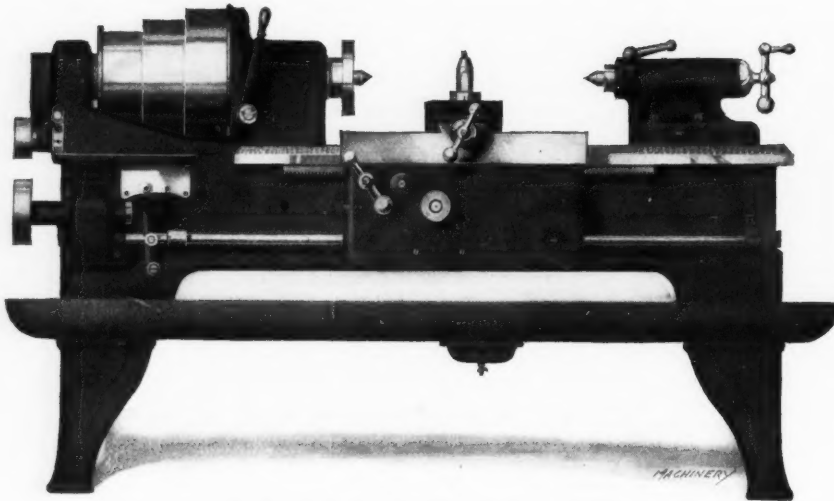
Rockford 16-inch High-power Manufacturing Lathe
